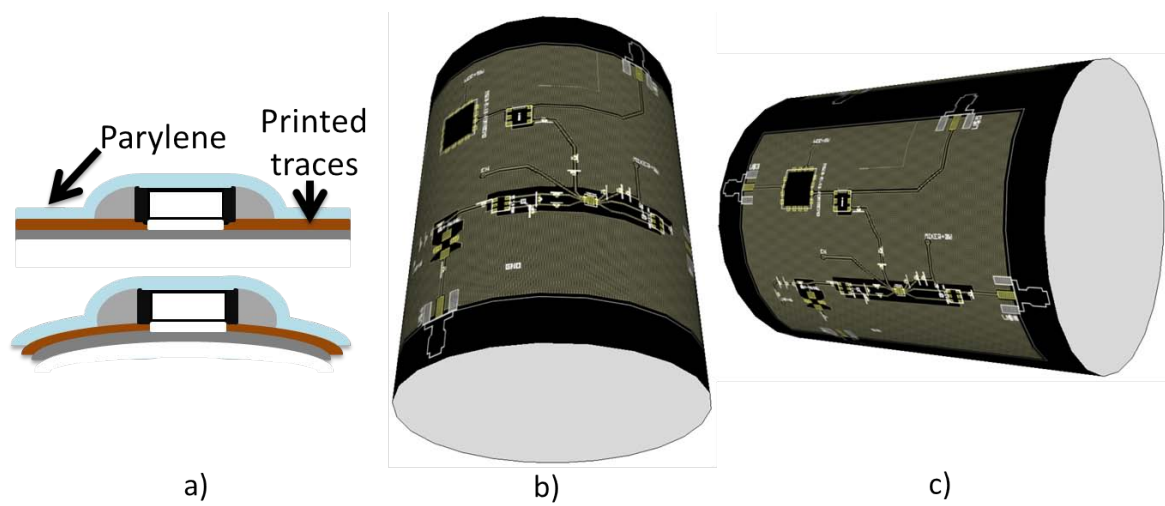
Illustration of a) parylene coating b) flexible system layout.
